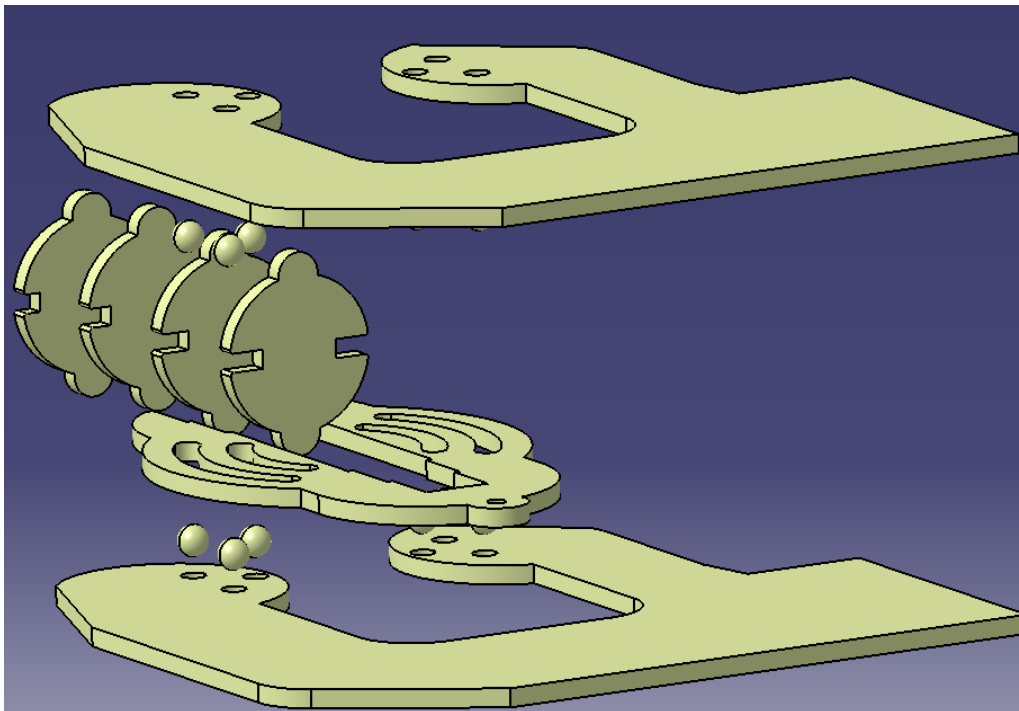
, Explosion of epoxy injector concept (Grindley, 2014)
